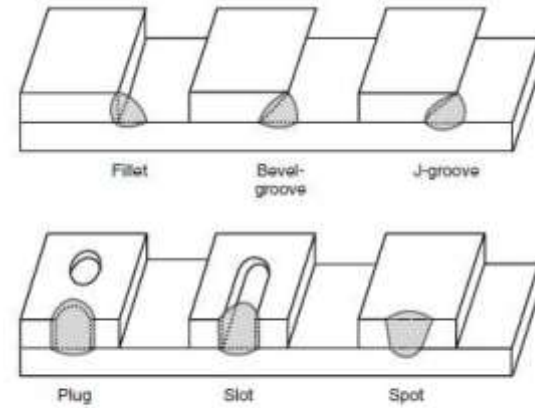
Types of welds that may be made with a basic lap joint.
